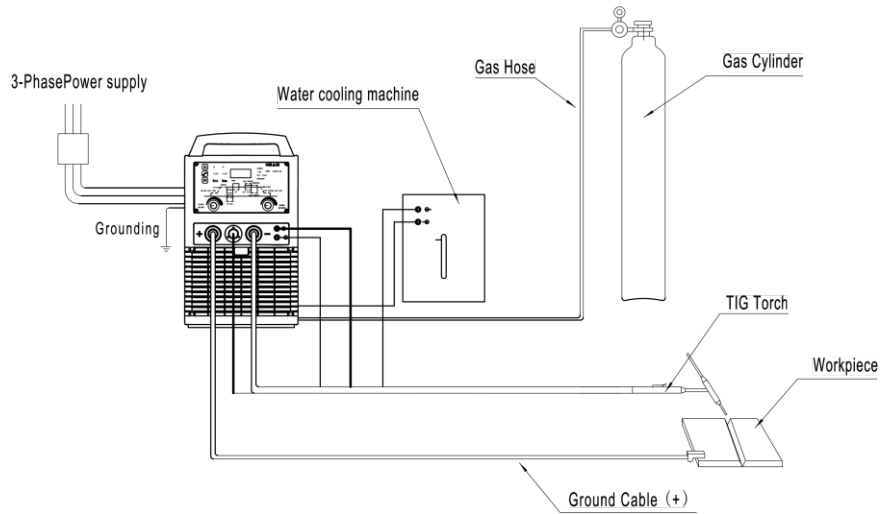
Connection and operation for water-cooling TIG welding (Separate water cooling machine)
